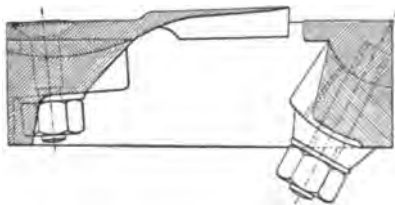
VORSTER Rotating Blade with Counter Blade.
